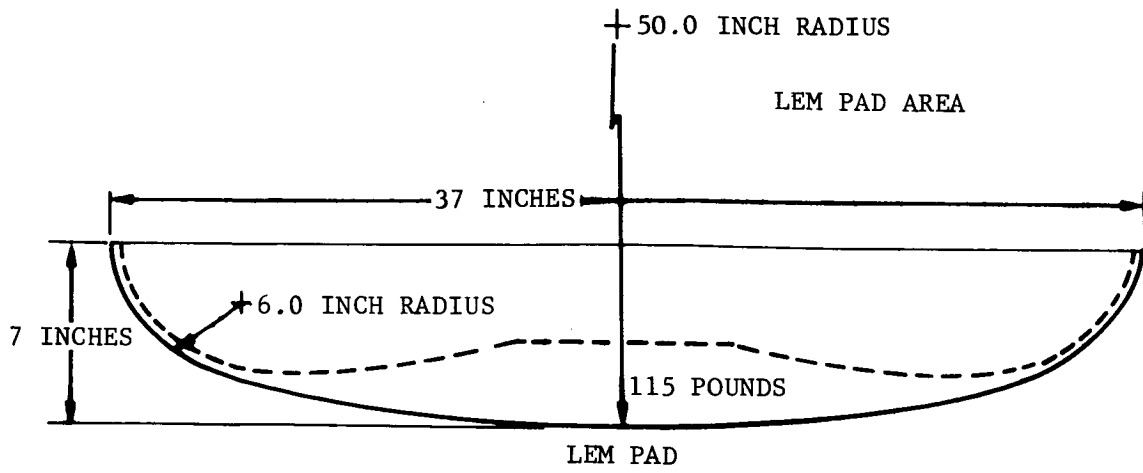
LEM PAD BEARING SURFACE VS. PENETRATION
